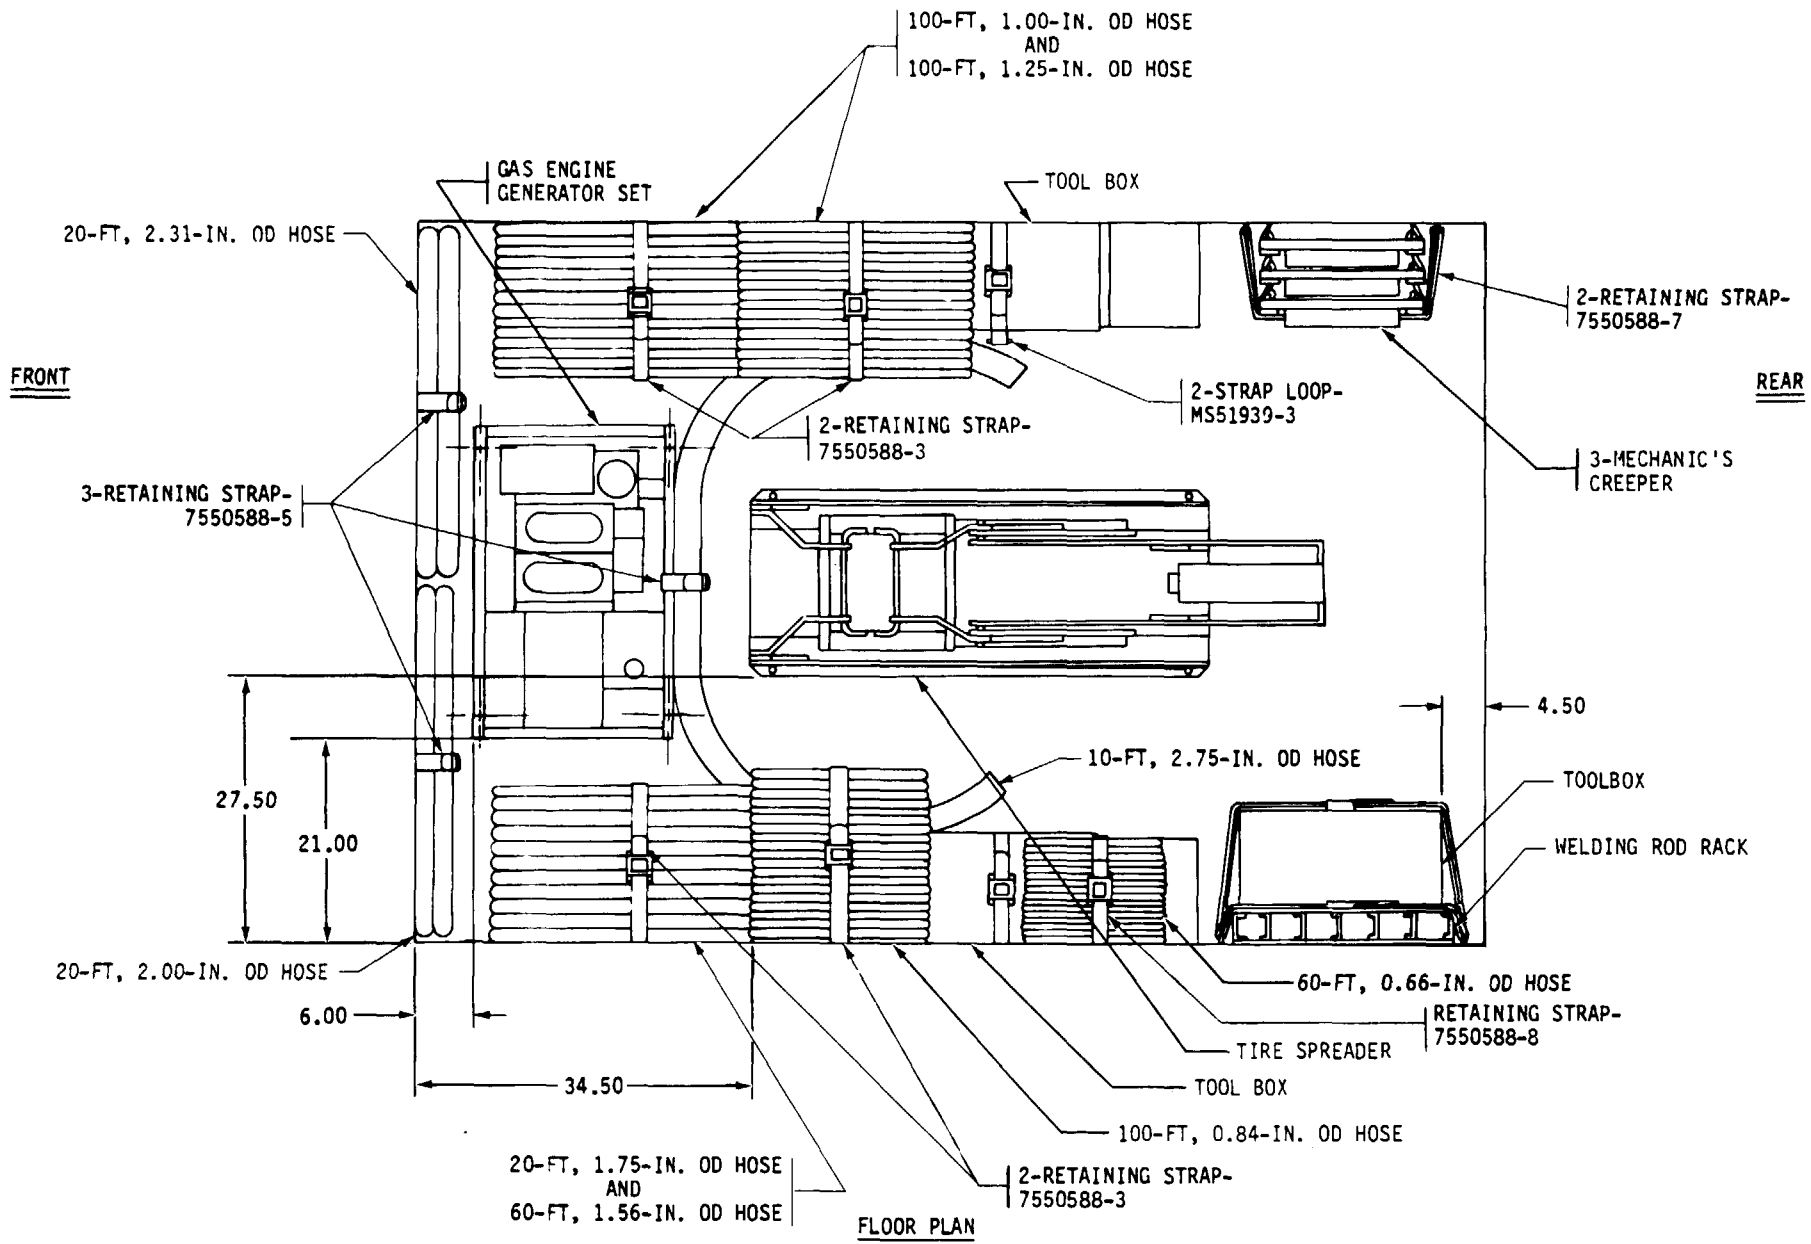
Components to be Mounted, Unit 6, M105A2, Floor Plan.
